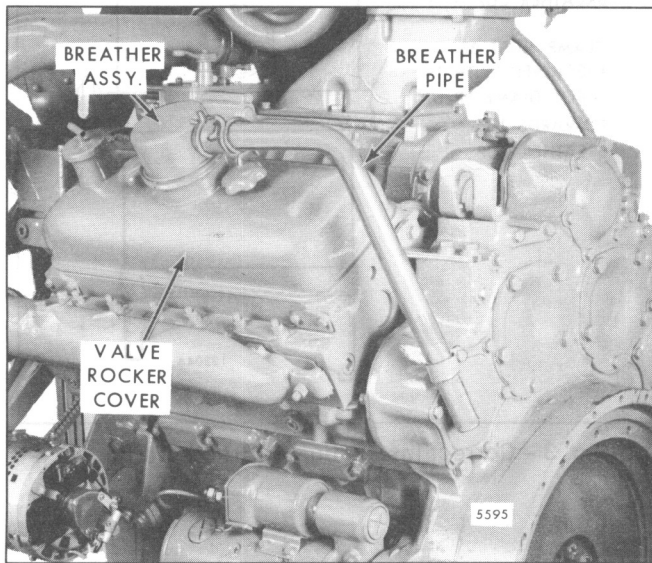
Typical Mounting of Breather Assembly on Valve Rocker Cover
